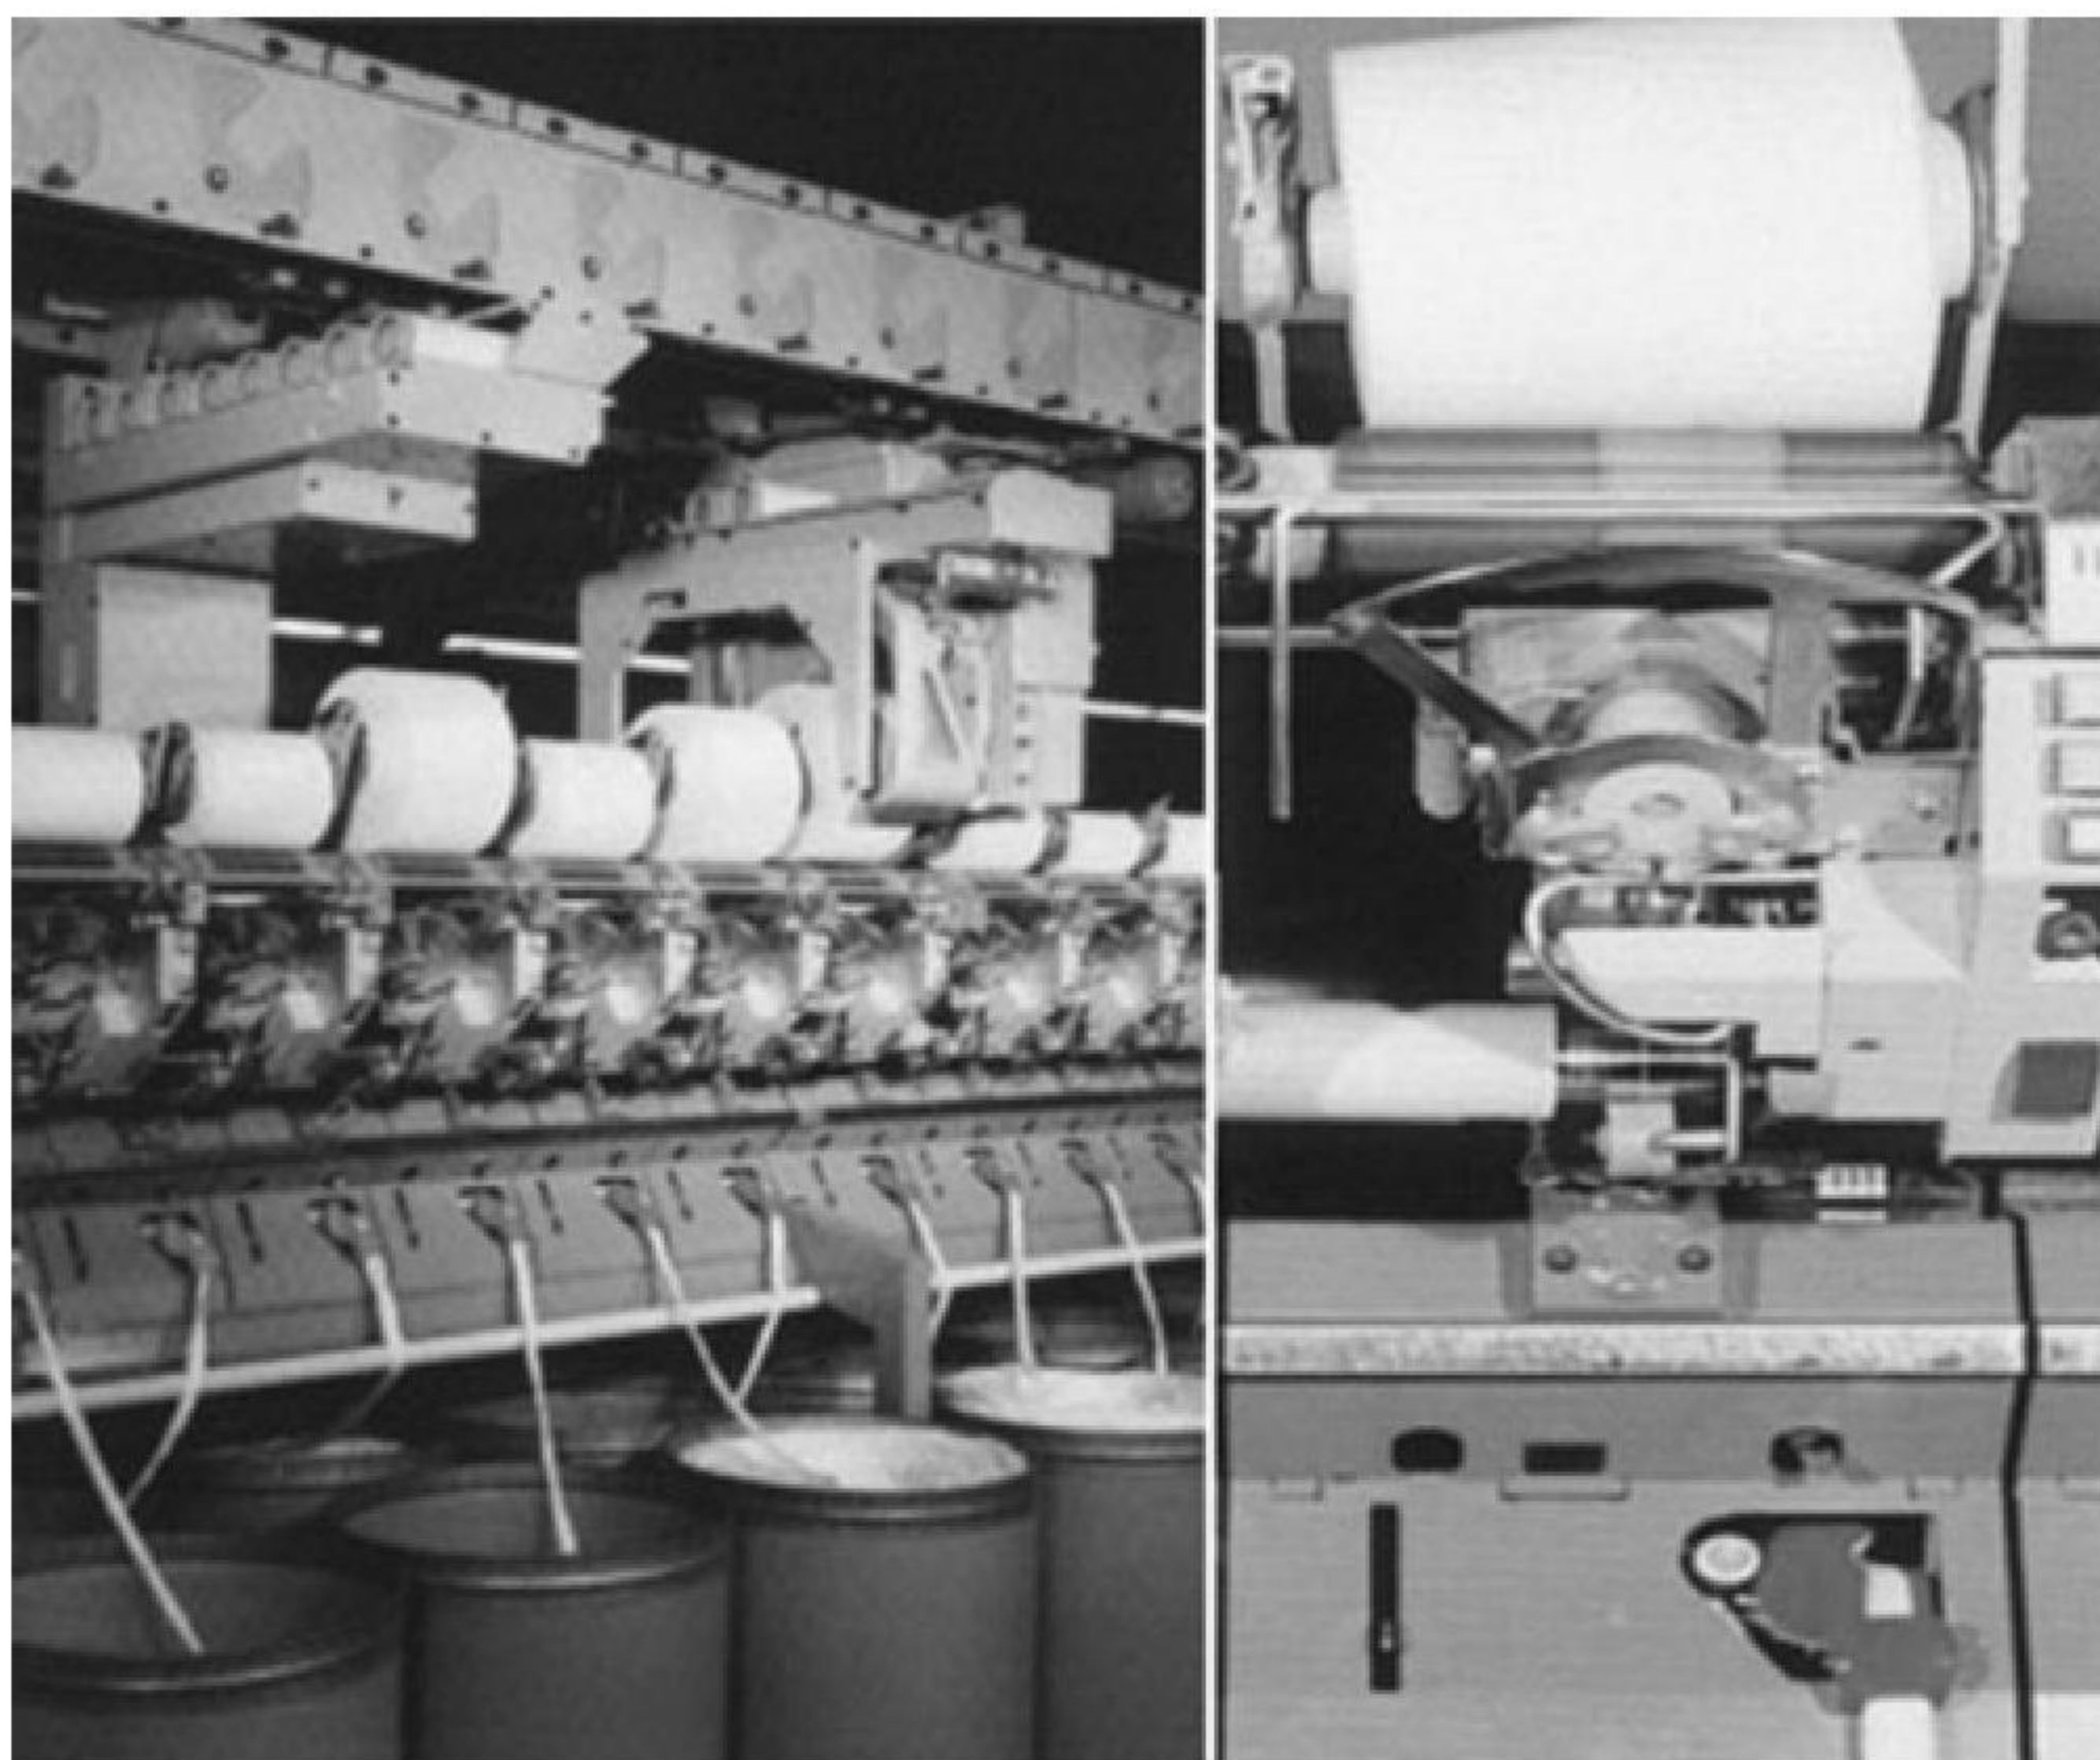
(See color insert following page 266.) Typical integrated spinning, yarn clearing, and winding on rotor machines. (Courtesy of W. Schlafhorst AG & Co.)
